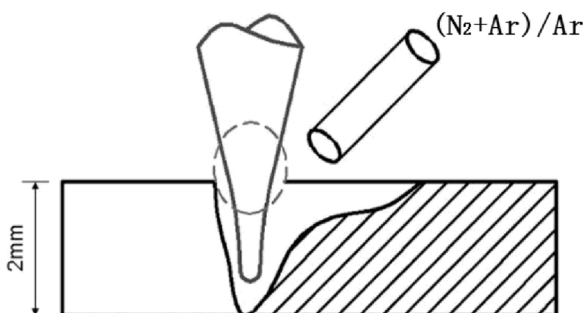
Experimental layout of the ultra-narrow-gap laser conduction welding with filler wire.
